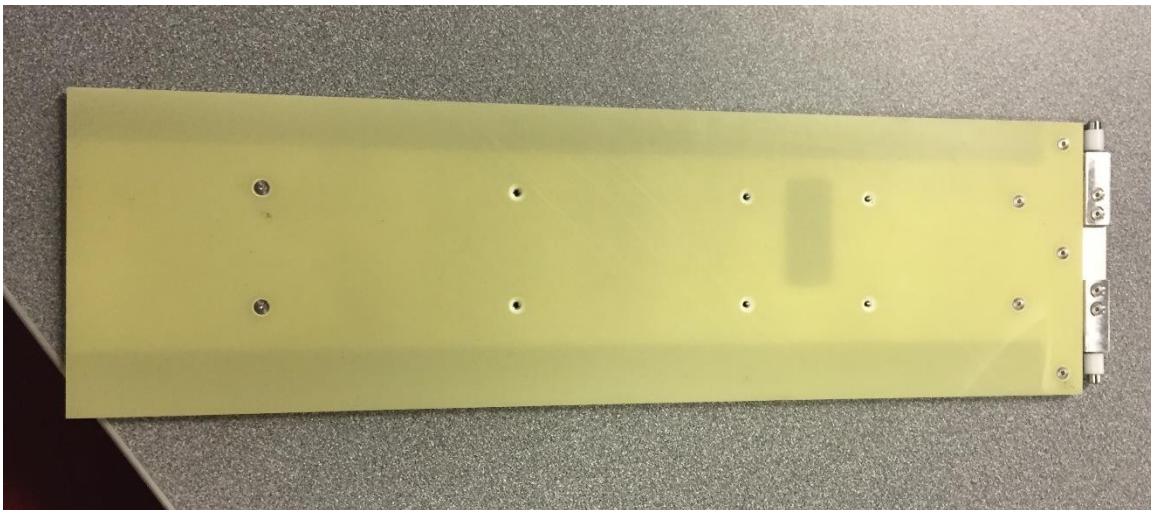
Solar Array (FR4) and Roller Bearings Assembly on the Side Backbone.
